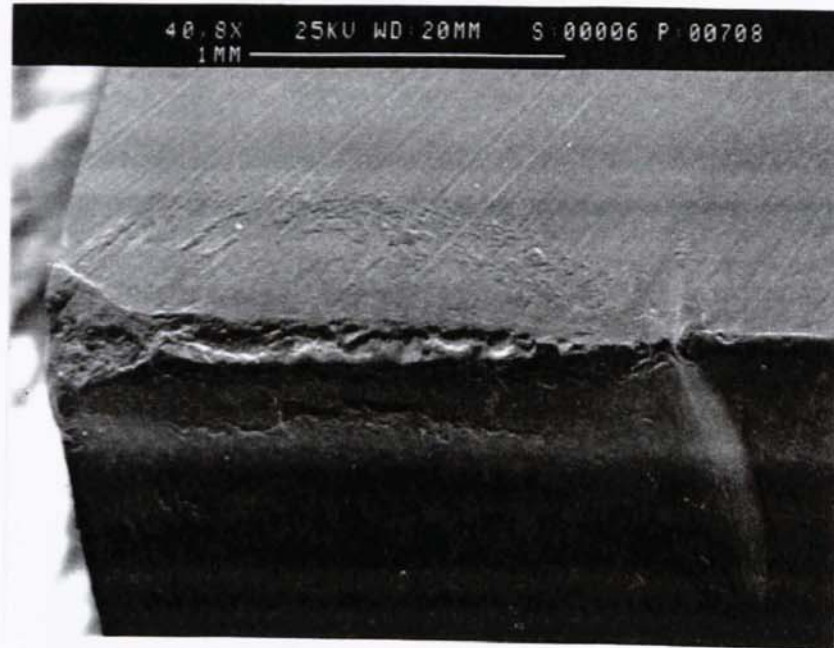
M2 HSS, cutting speed 20 m/min, rake angle 5°, flank angle 10°, and feed rate 0.15 mm/rev.
